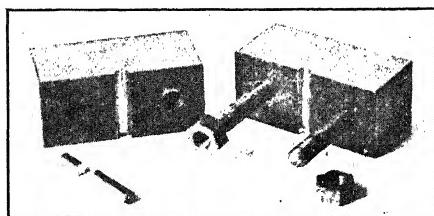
UNSATISFACTORY BRIQUET MOLD.
